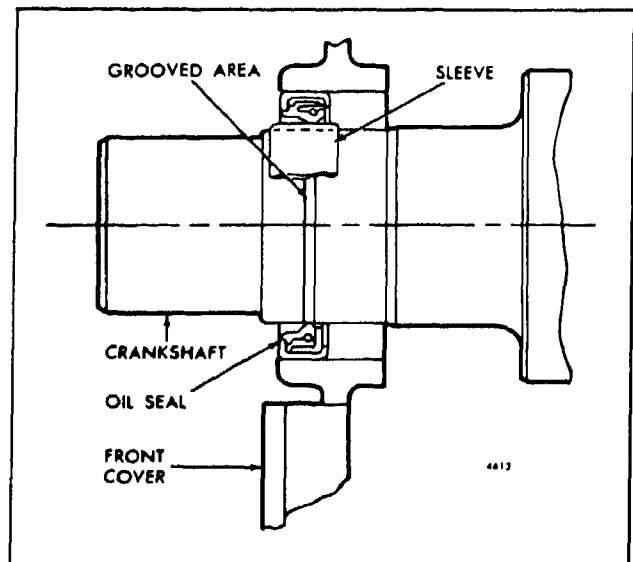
Use of Front Oil Seal Sleeve on Grooved Crankshaft (In-line Engines)
